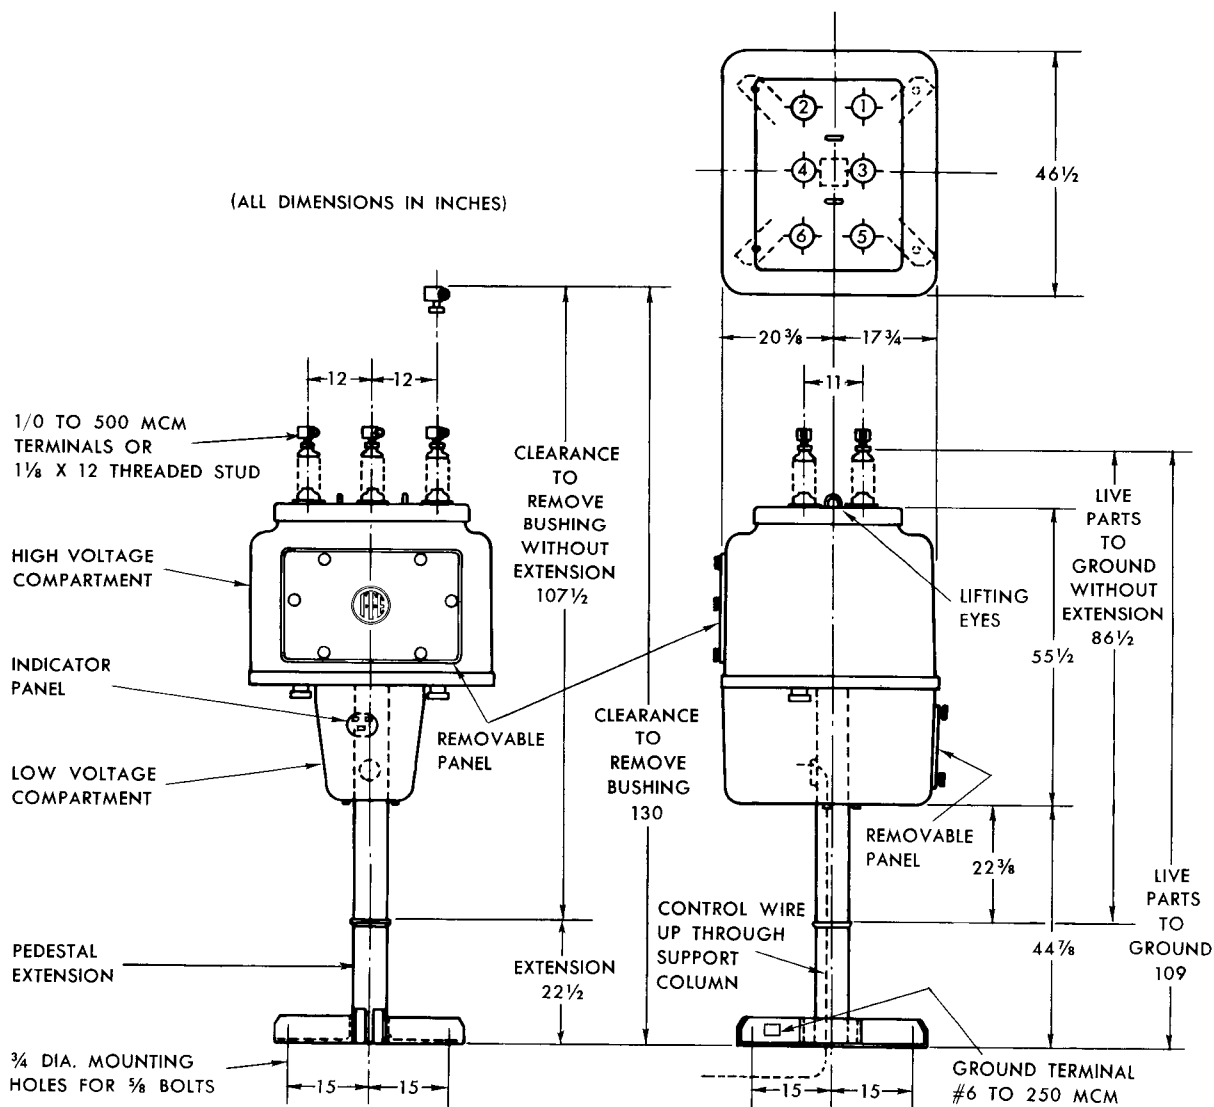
Assembly of the Pedestal Extension on the Model VRP.
